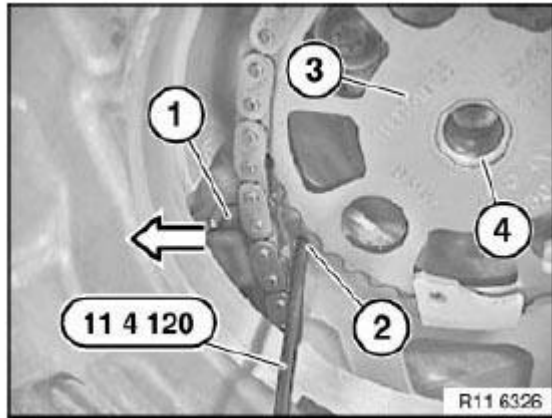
Identifying Sprocket Wheel And Vacuum Pump
